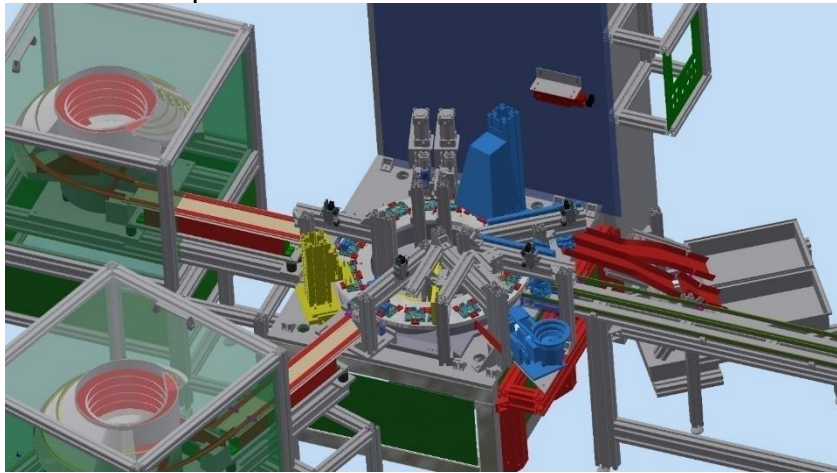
Assembly line for parts of an automatic circuit breaker
